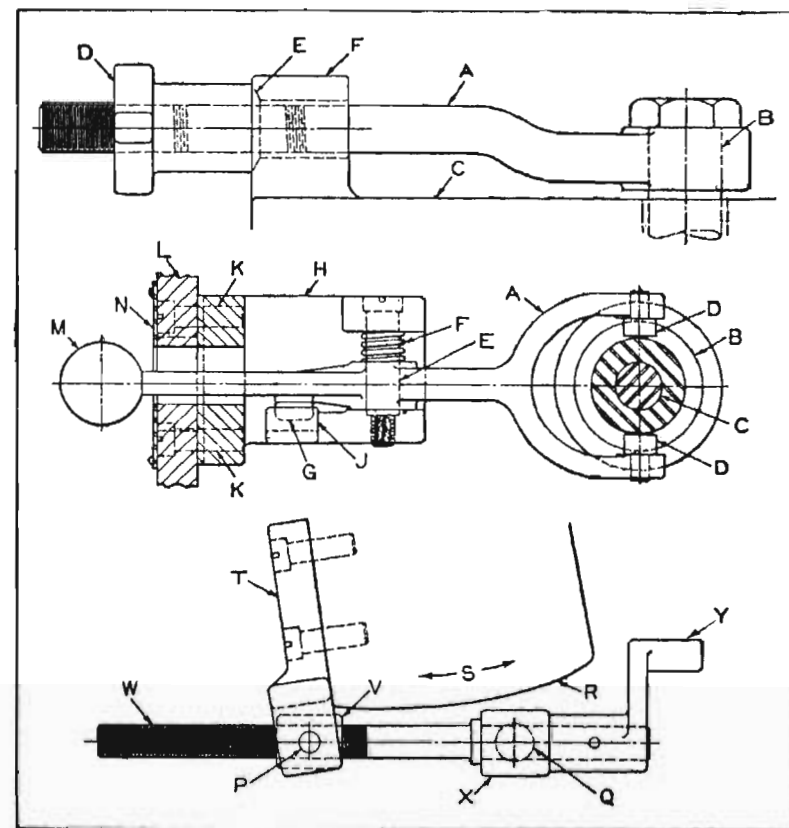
Three Types of Pivotal Joints Designed for Special Purposes.
